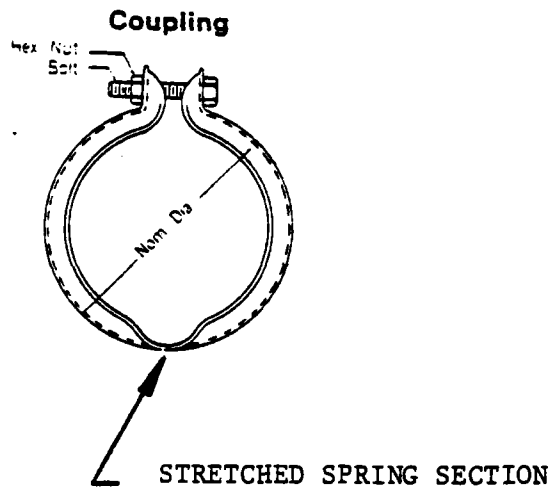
RECEIVER TUBE FLANGE CLAMP
